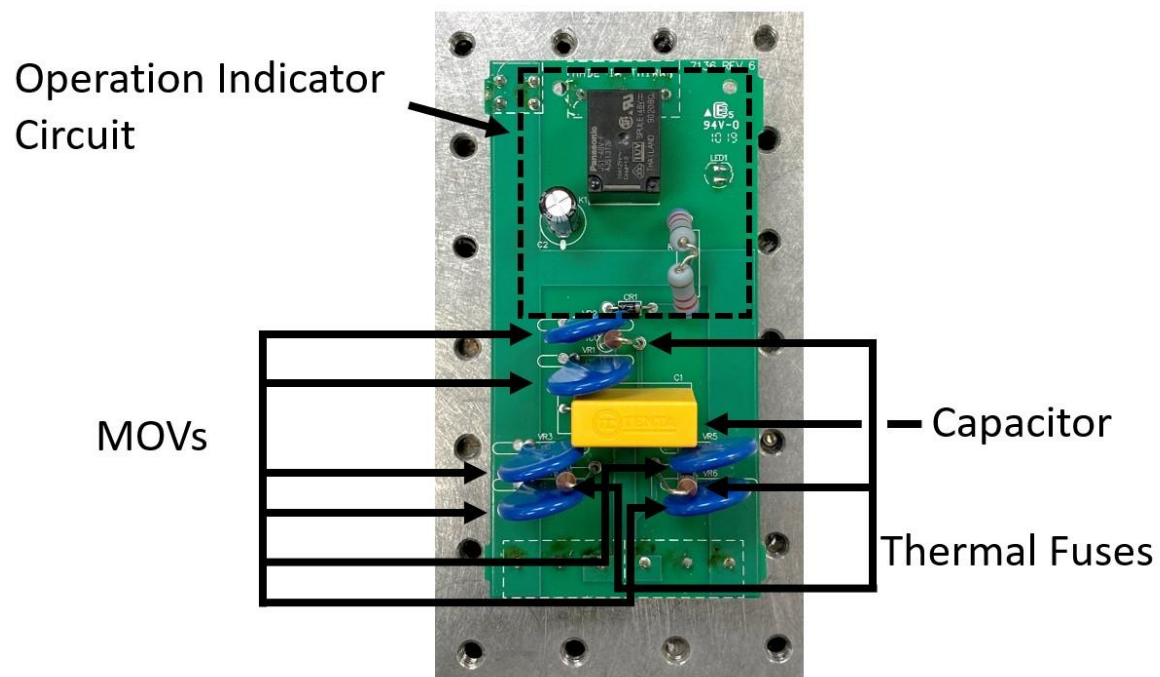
Photo of the Exposed PCB of the SolaHD® TVSS
